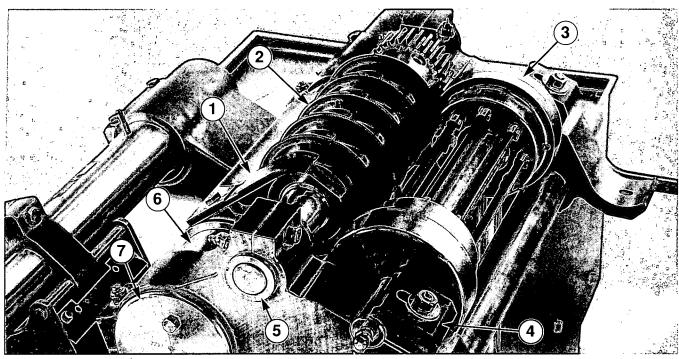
The dicing unit. (1) Stripper Plate, (2) Circular Knife Spindle, (3) Crosscut Knife Spindle, (4) Side Frame Cap, (5) Circular Knife Spindle Bearing, (6) Hinge Tube, (7) Retaining Cap (fastened to support bar).
